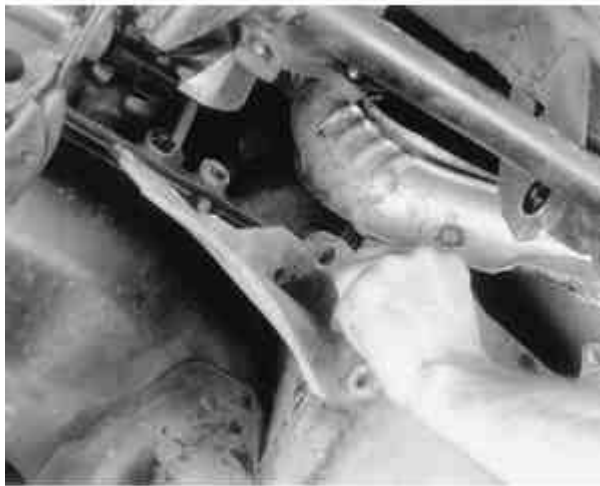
Remove the lower mounting bolt for the transfer case shifter lever
